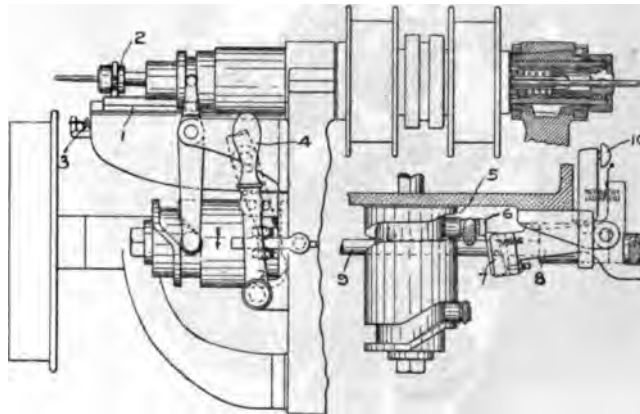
DEVICES FOR STOPPING MACHINE WHEN BAR OF STOCK IS EXHAUSTED.
